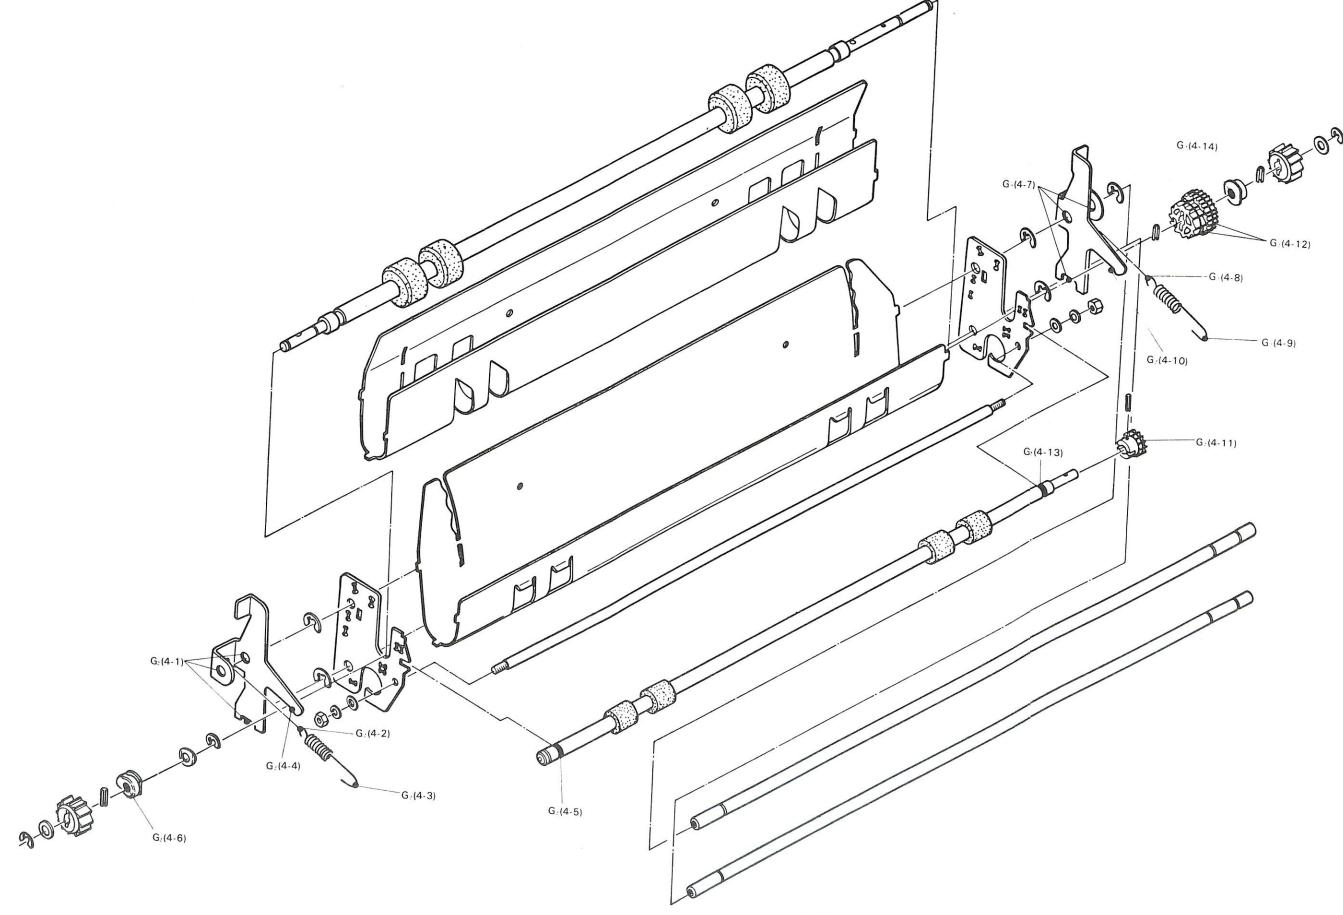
Lubrication Points and Bonding Points (Paper Guide Unit)
